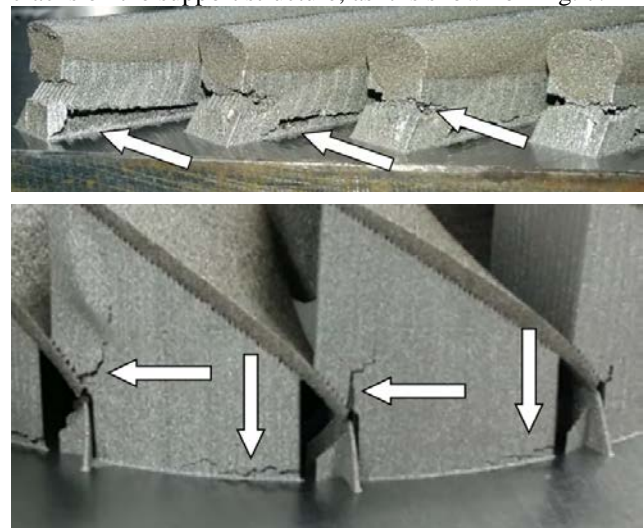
Example support structure cracks, caused by residual stress on DMLS build part
